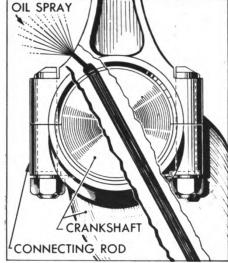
Engine Oiling (Connecting Rod Bearings and Timing Chain)
